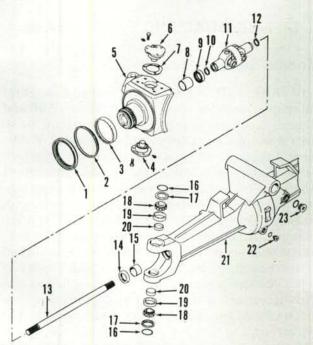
Exploded view of pivot housing and components used on front drive axle.
